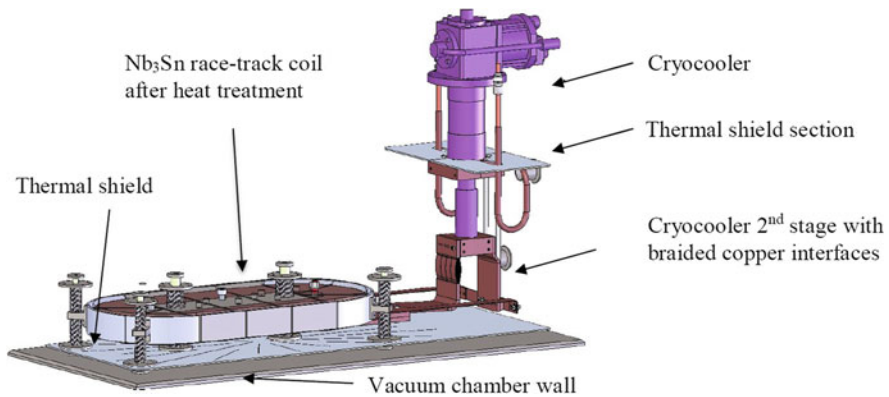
Bolt-on design (vacuum chamber open for clarity), directly to the cold plate and race track cold mass with lead in/out
